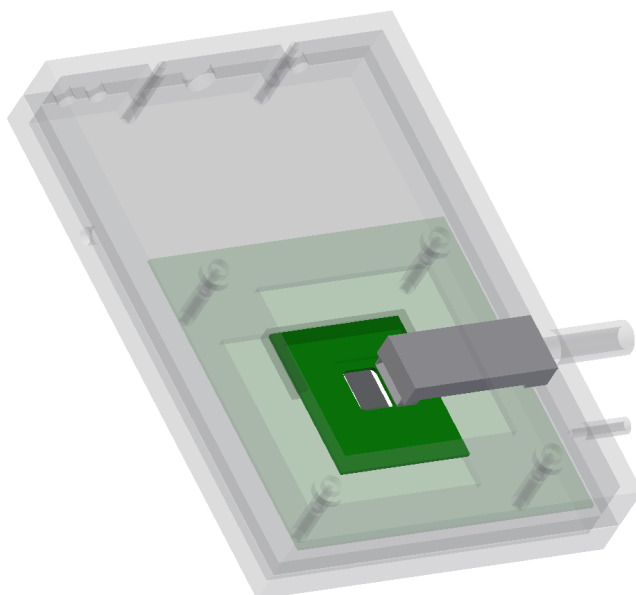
Drawing of gas cooling box for irradiated sensors including mother PCB, insert PCB, and sensor (view from backside)
